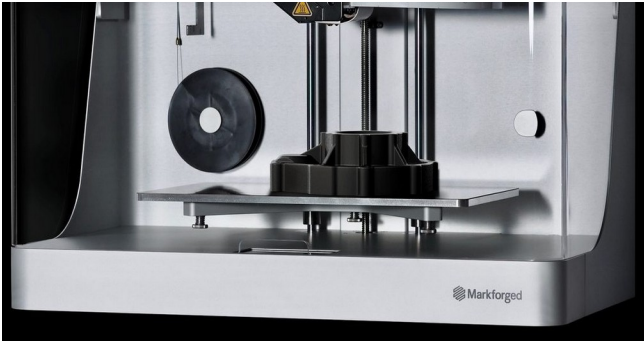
Appearance of the “Markforged Mark Two” 3D printer
